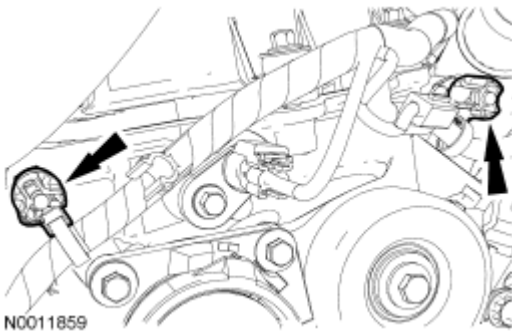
Locating Engine Wiring Harness Pin-Type Retainers
